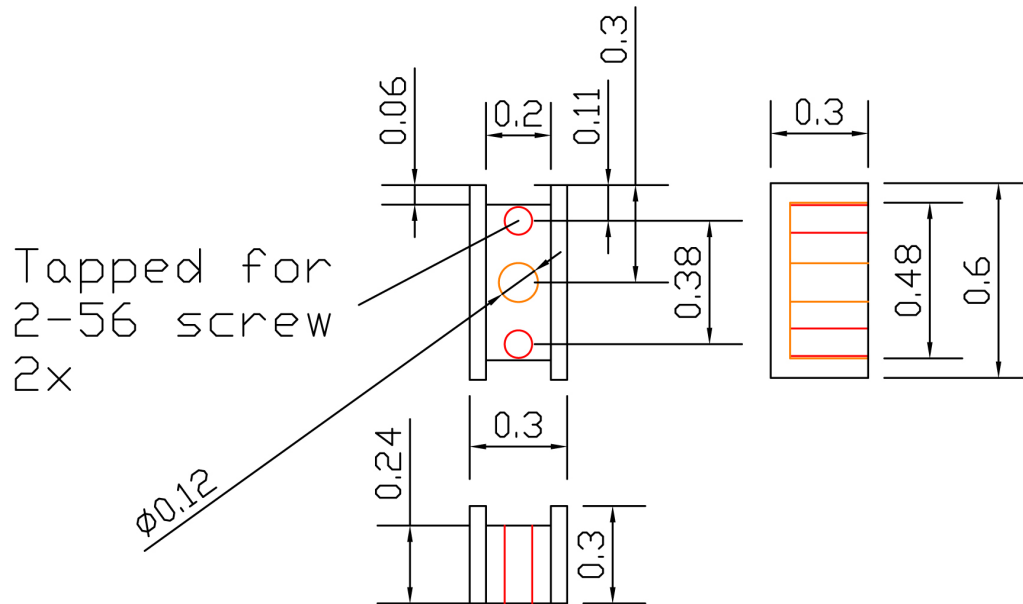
Block diagram, screw holes/dimensions in inches. The *Cu* CPW is cut to fit and conductive epoxy is used to mount it into the groove. An endmill is then used to cut a channel perpendicular to the direction of the CPW which is deep enough for the sample/wafer to be mounted into.
